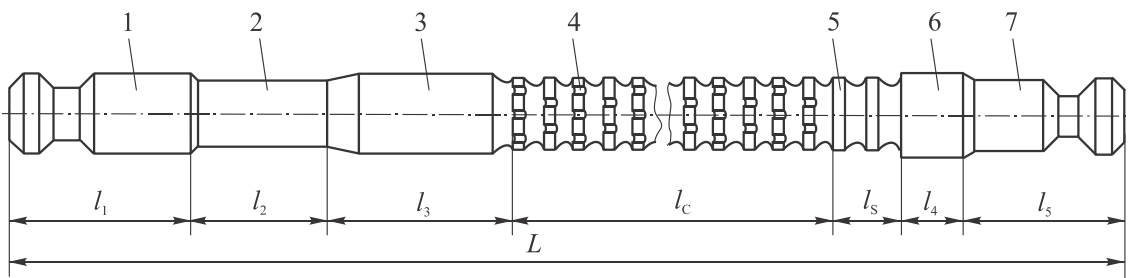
Construction of an internal broach: (1) pull-end; (2) neck; (3) front pilot; (4) cutting part; (5) sizing part; (6) rear pilot; (7) retriever
